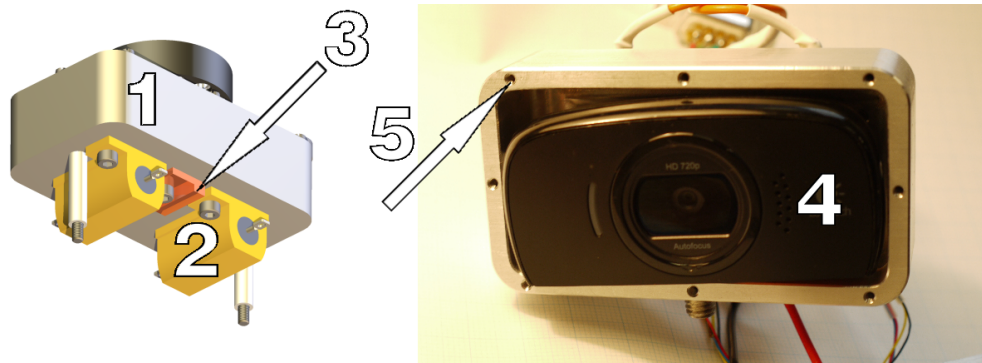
Left: CAD render, worm's eye view of the inner unit: 1- inner aluminium casing, 2- two heating resistors, 3- copper support for PT-100 sensor. Right: photograph of the inner casing with removed lid: 4- camera with removed stand, 5- threads to close the lid.
